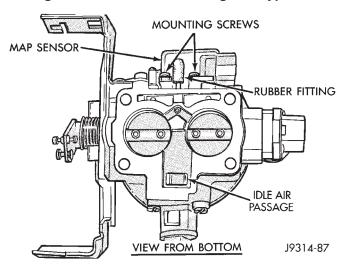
Rubber L-Shaped Fitting—MAP Sensor-to-Throttle Body
